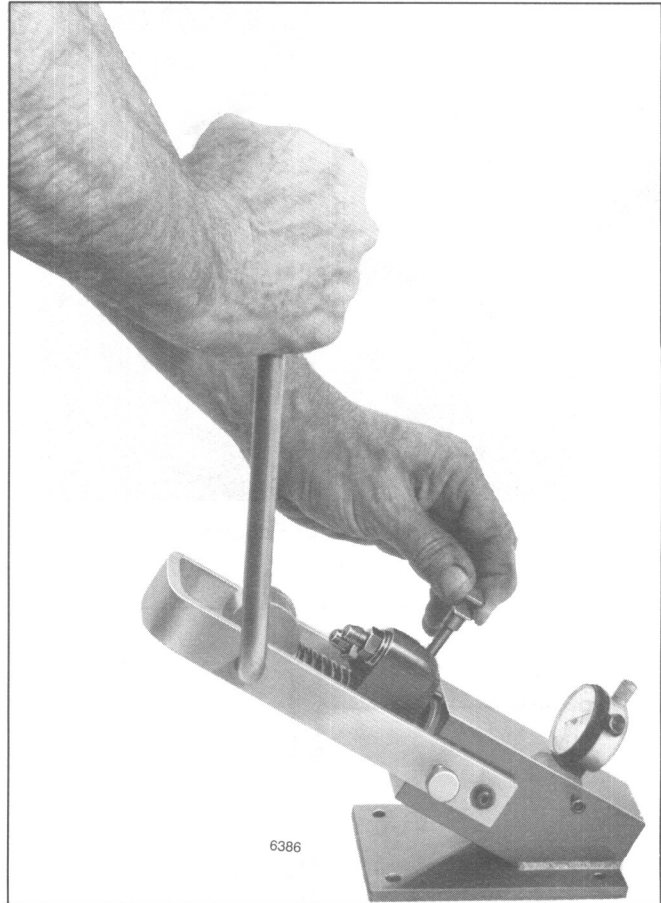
Checking Rack for Freeness in Tester J 29584
